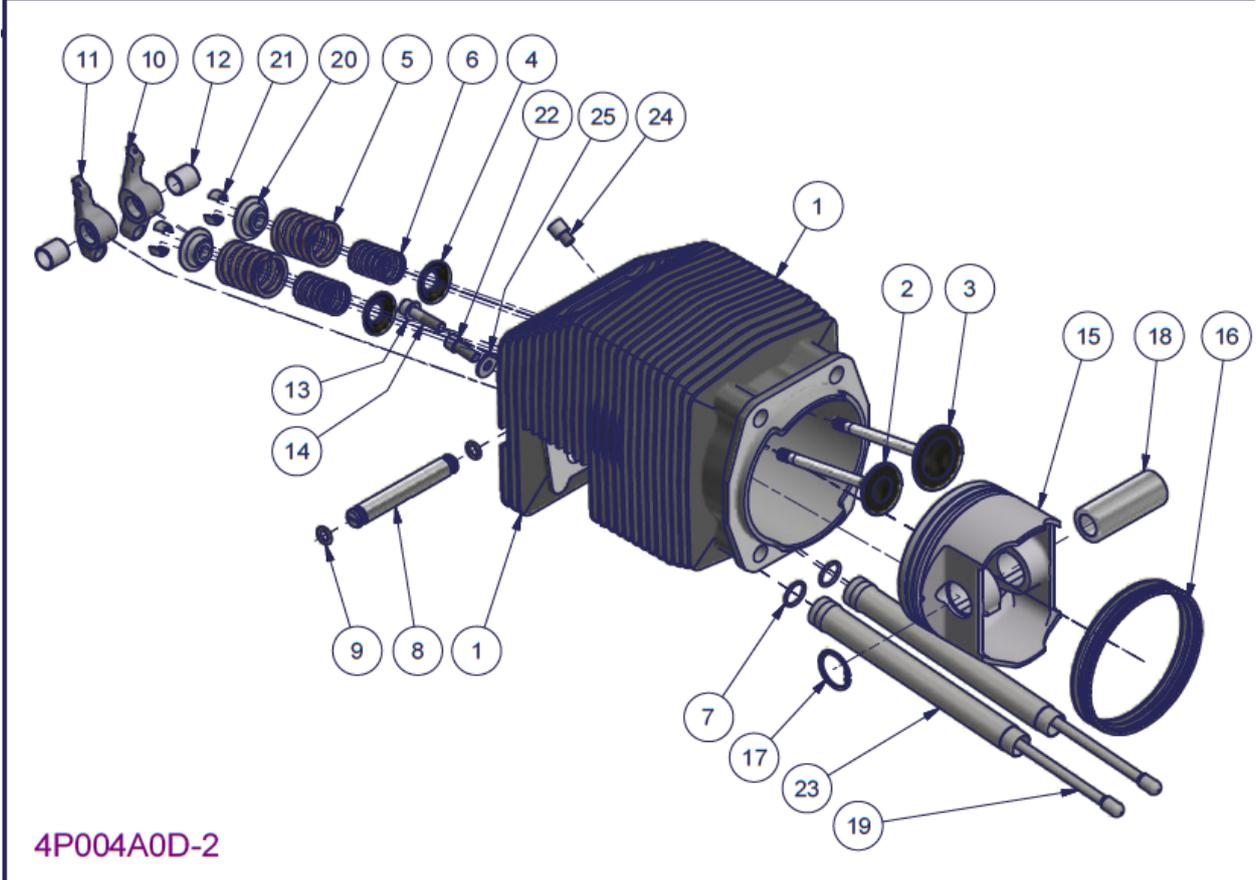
2200/3300 Cylinder subassembly - Parts list
